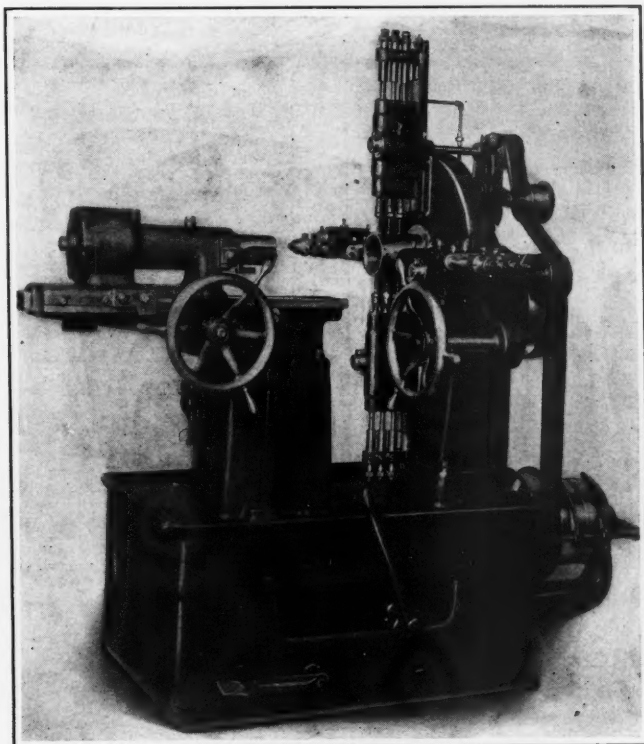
Langelier Drilling Machine with Four Sets of Three Opposed Spindles for drilling Twelve 1/8-inch Oil-holes in Willys-Overland Motor Valve Sleeve
